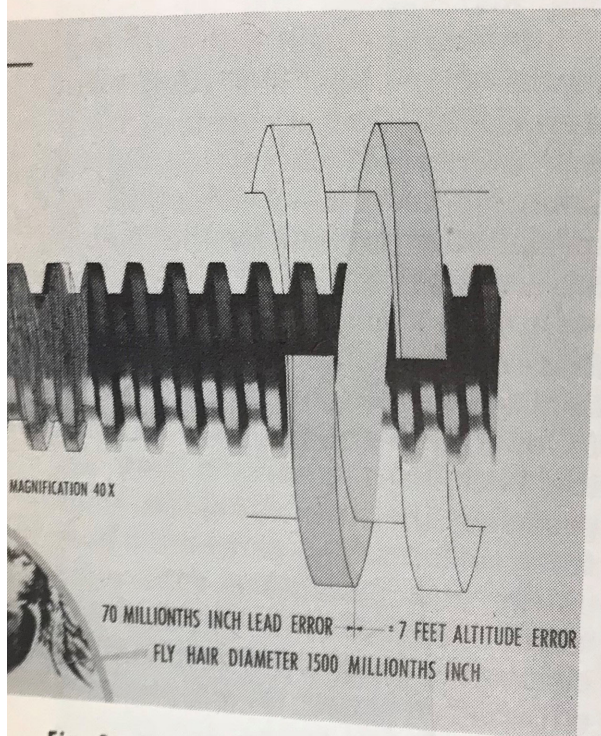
View of the jackscrew which is used to propel the fulcrum carriage along tracks.
